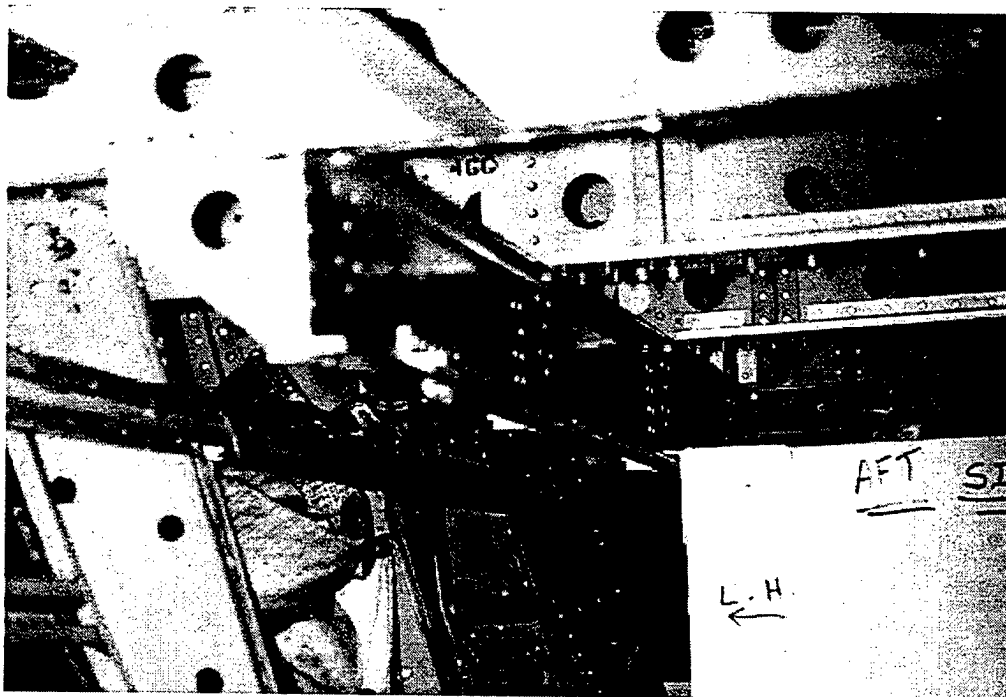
POSTTEST AUXILIARY FUEL TANK LEFT ATTACHMENT
